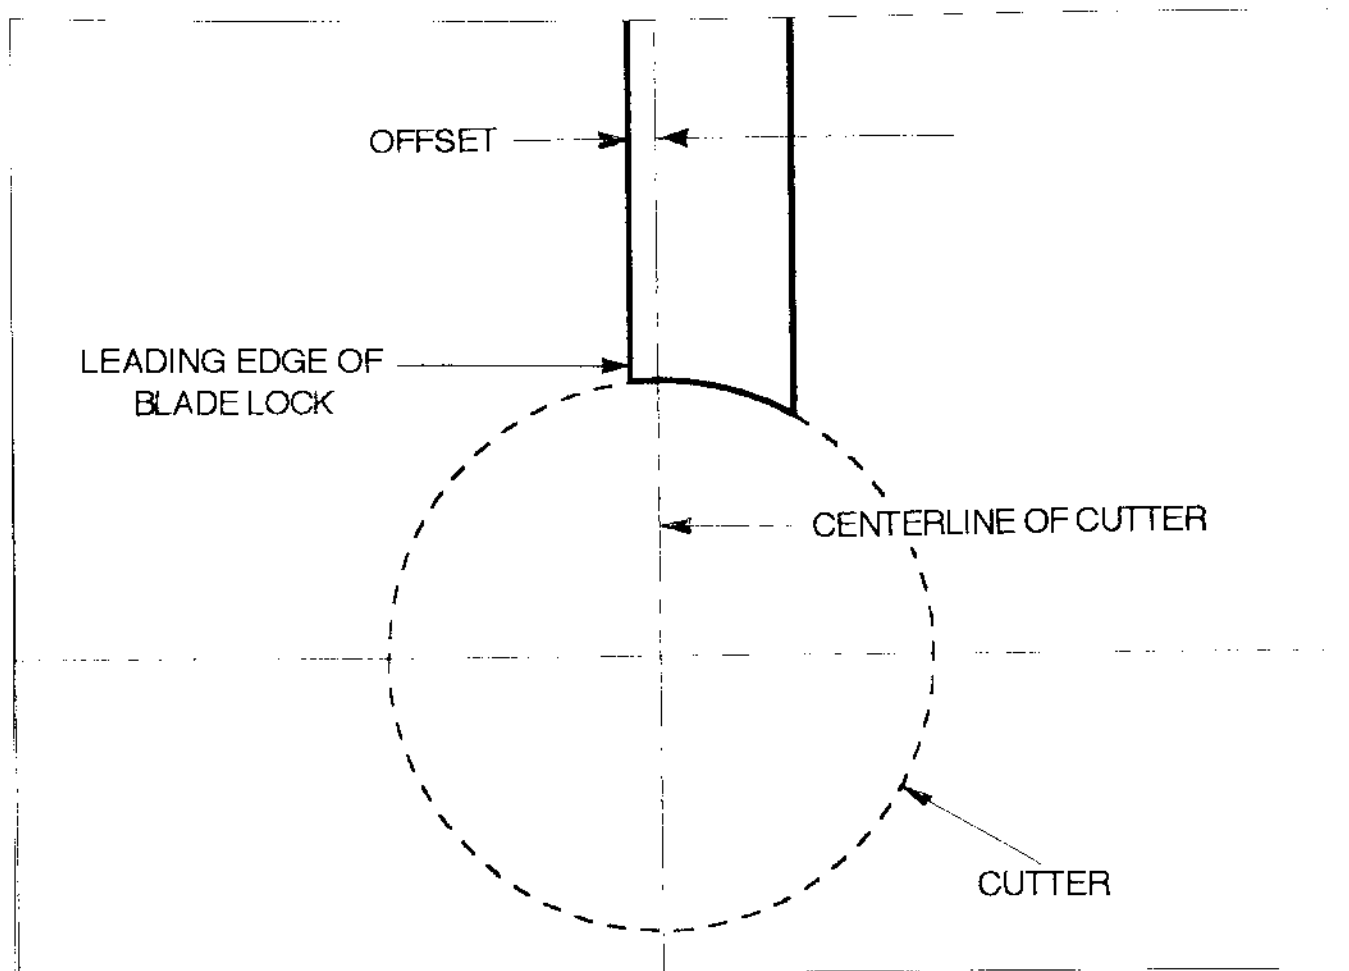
Positioning of the milling cutter, with a small offset from the blade's leading edge, is critical.
